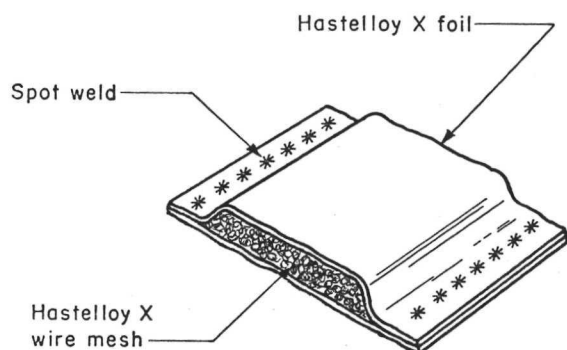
Spot-welded window-seal assembly for supersonic aircraft.
